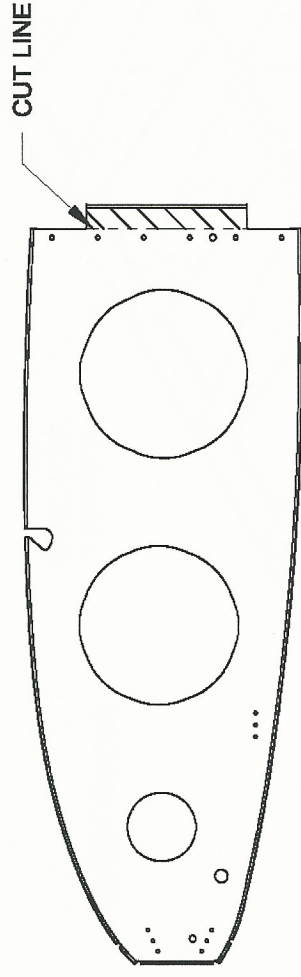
W-1208 NOSE RIB AFT FLANGE TRIM
